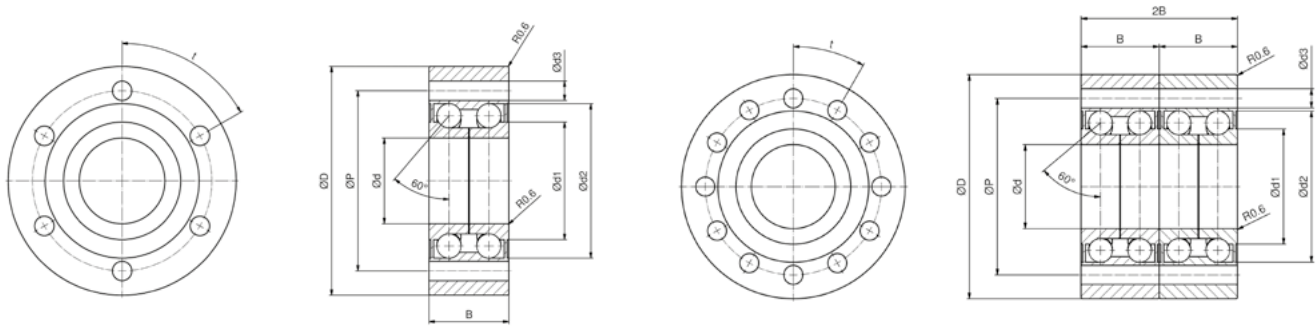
Double row axial angular contact ball bearings BSTU and BSTU_D2
